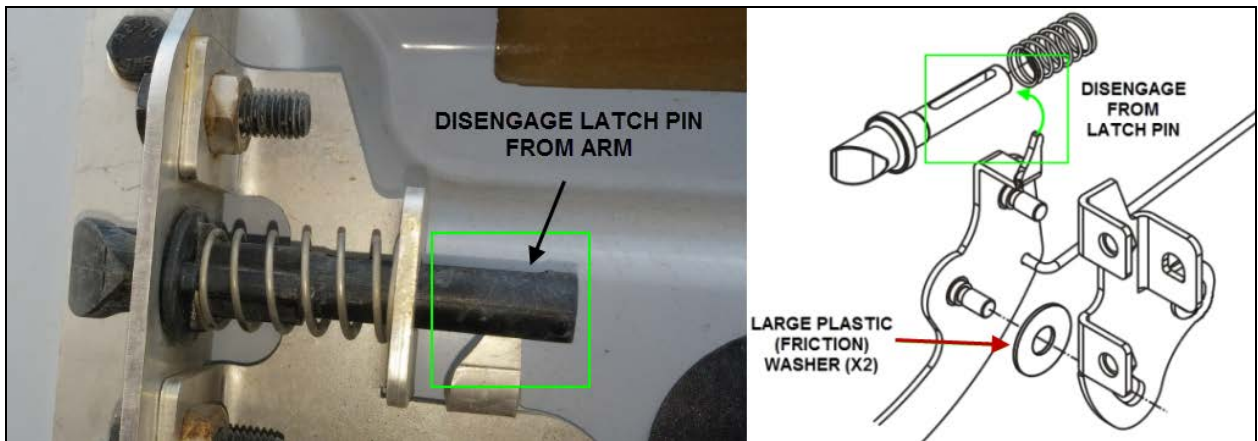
LATCH PIN ENGAGEMENT & ARM FRICTION WASHERS
